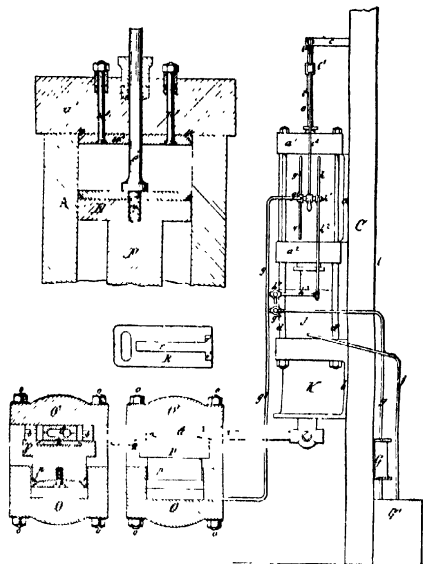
The Hyatt Apparatus for Manufacturing Pyroxylin.
